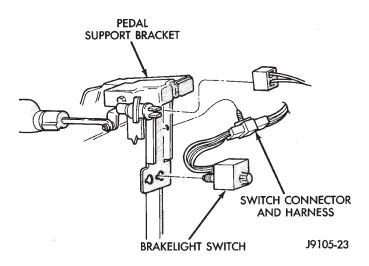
Brakelight Switch Mounting And Location (XJ/YJ)
